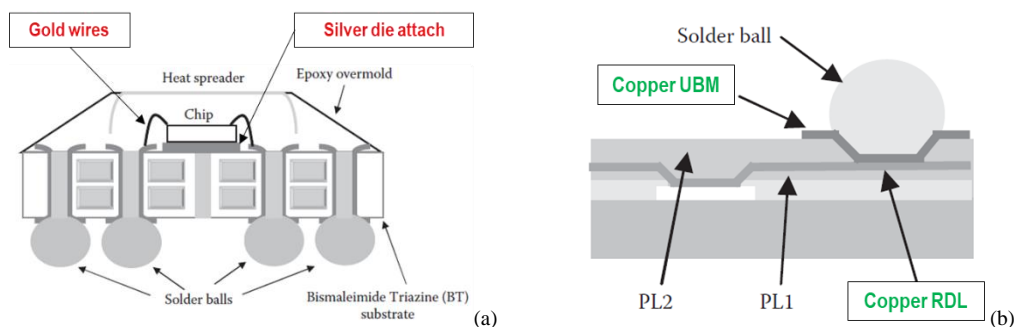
Cross section views showing the basic subparts of (a) a BGA-typed component, and (b) a CSP-typed component. Figures extracted and adapted from [176].
